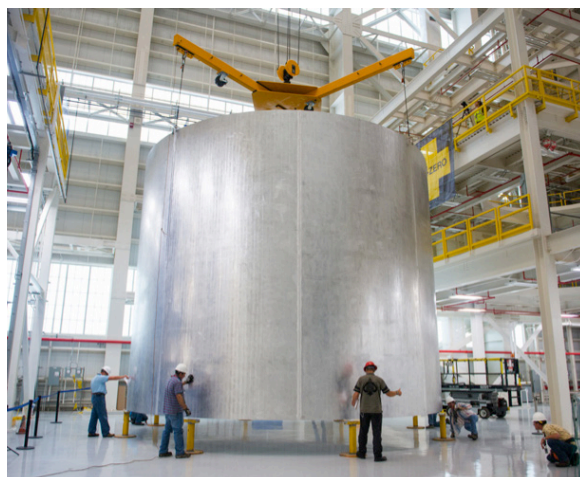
tank confidence barrel section welded at MAF, July 2013.
